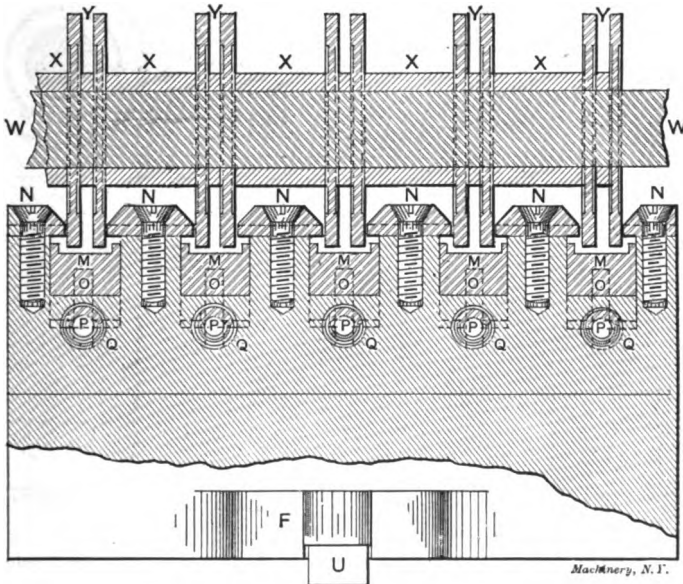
Longitudinal Section of Fixture, Fig. 63, and Gang of Cutters.
